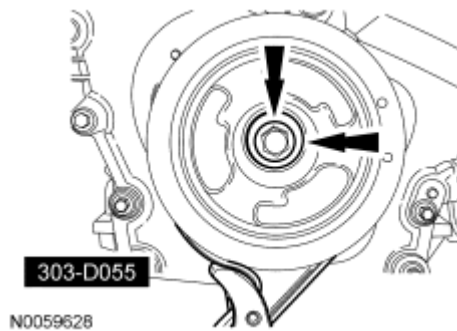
Removing Crankshaft Bolt & Washer Using Special Tool (303-D055)
